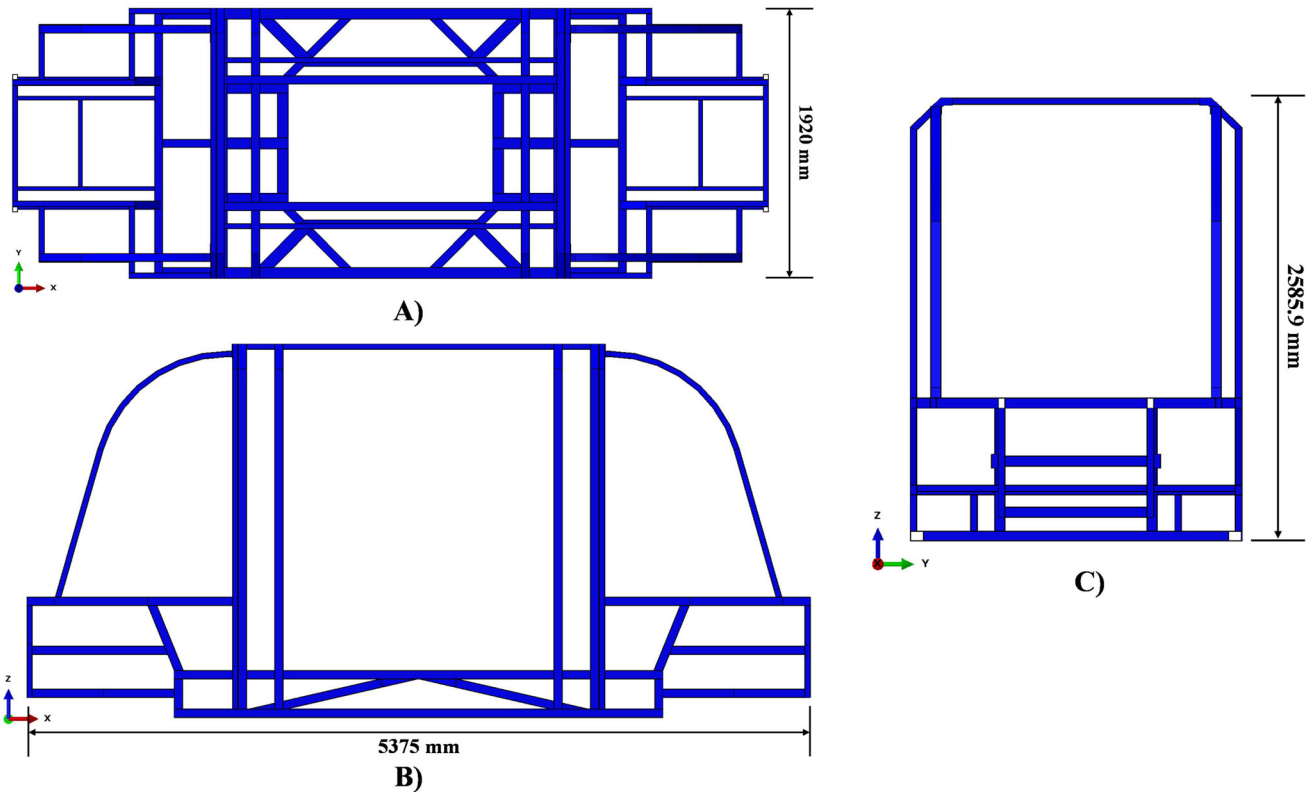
Chassis geometry and dimensions: (A) top view; (B) lateral view; (C) front view
